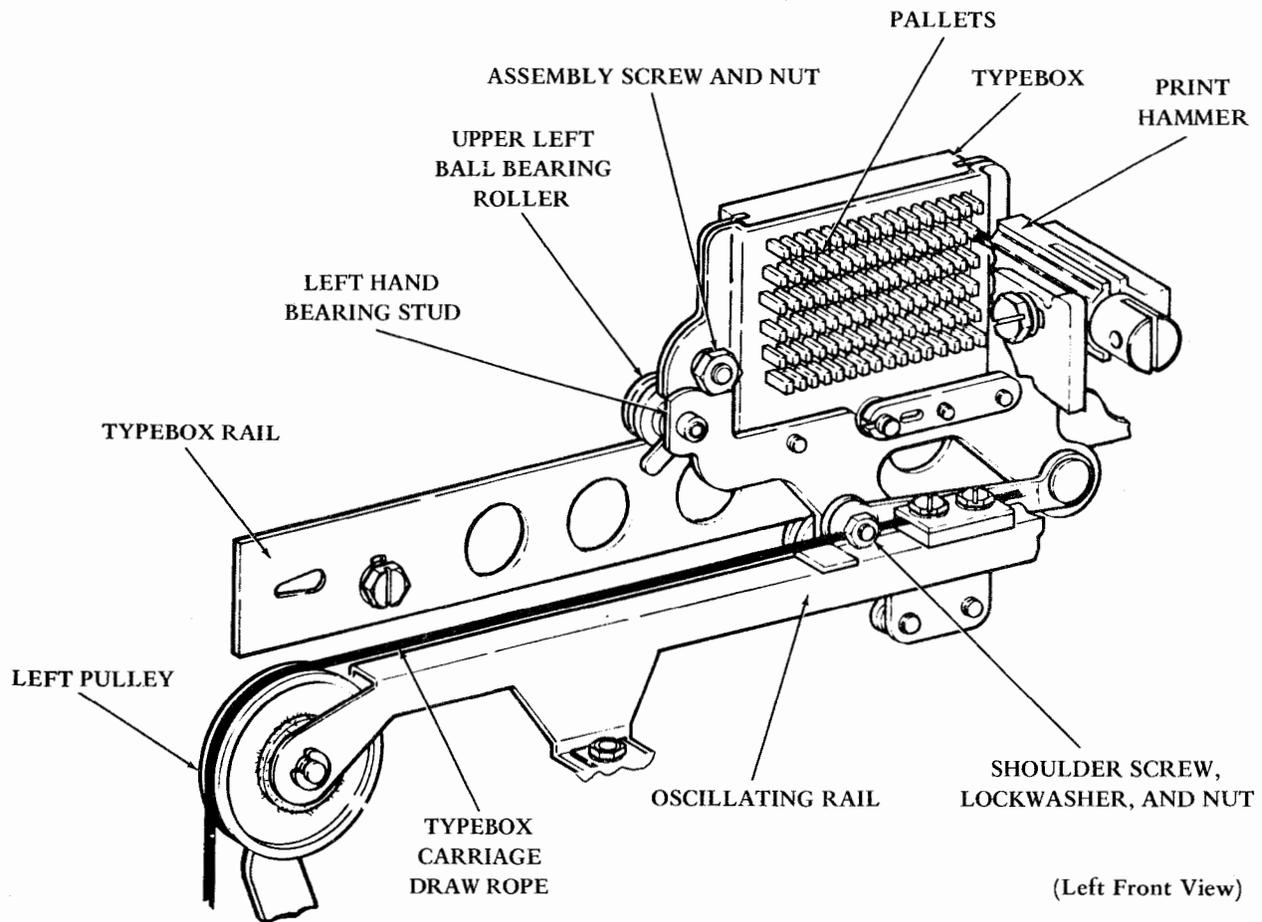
Typebox, Typebox Carriage and Oscillating Rail
